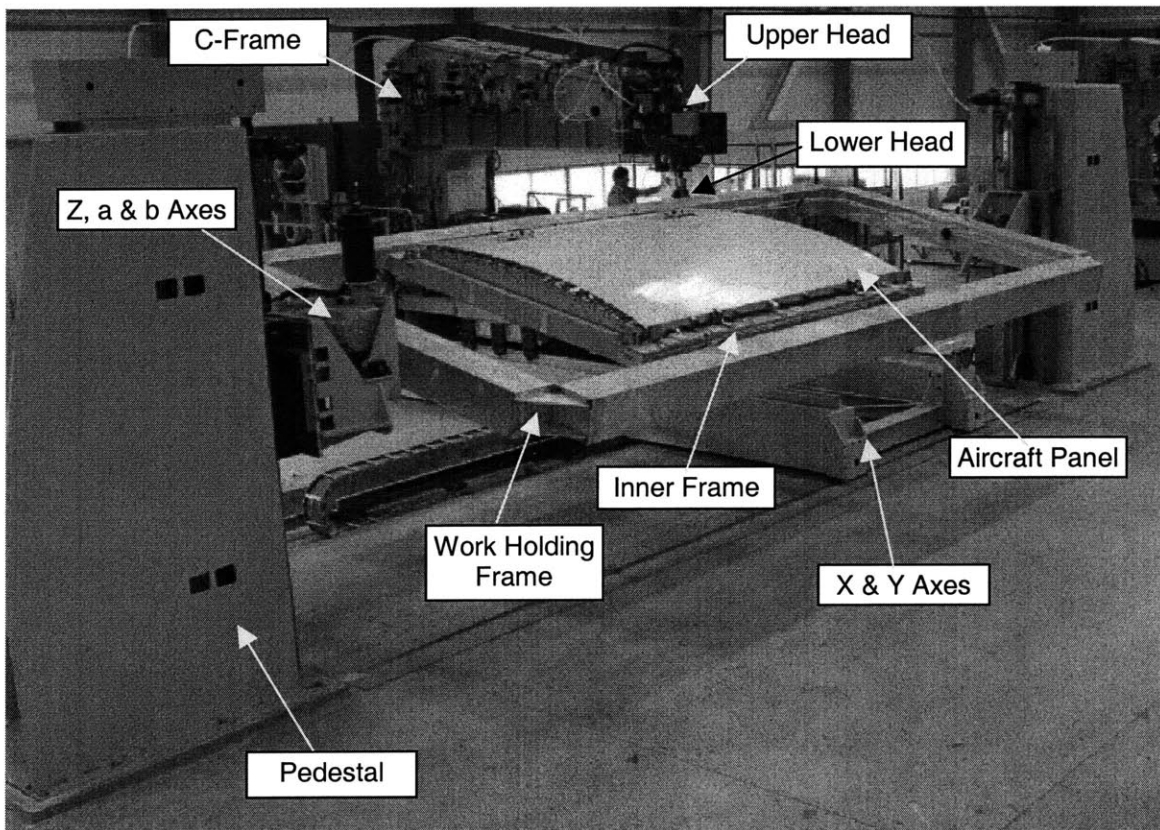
Airbus Assembly - 5-Axis Riveting Machines [8]
